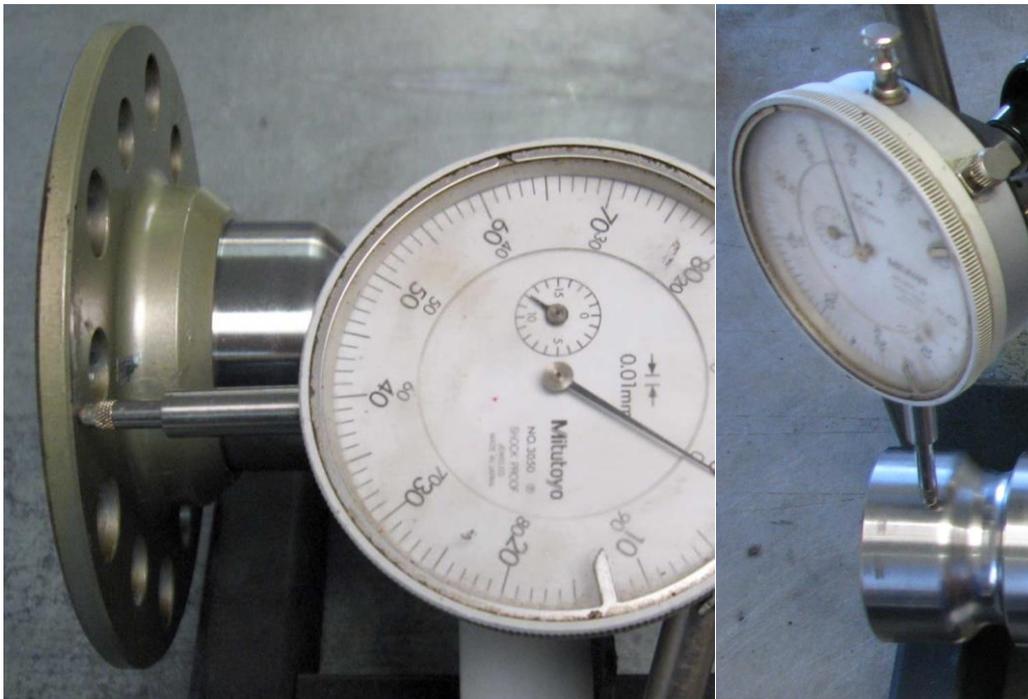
Dial Indicator Position for Crankshaft & Prop Flange Run Out
